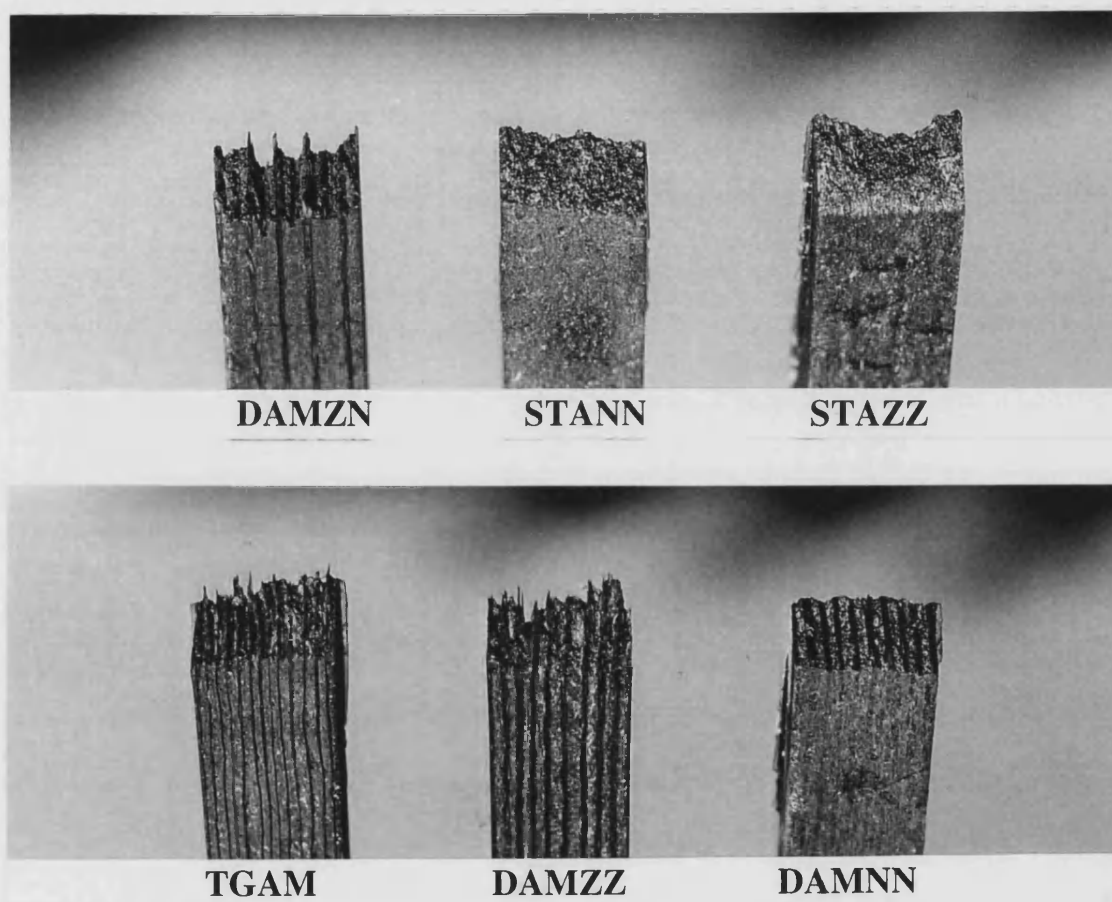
Typical fracture surfaces for each of the six model materials tested in edgewise flexure.
